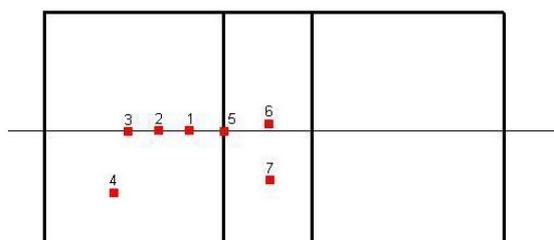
Points of measure in as-welded condition steel test specimen
